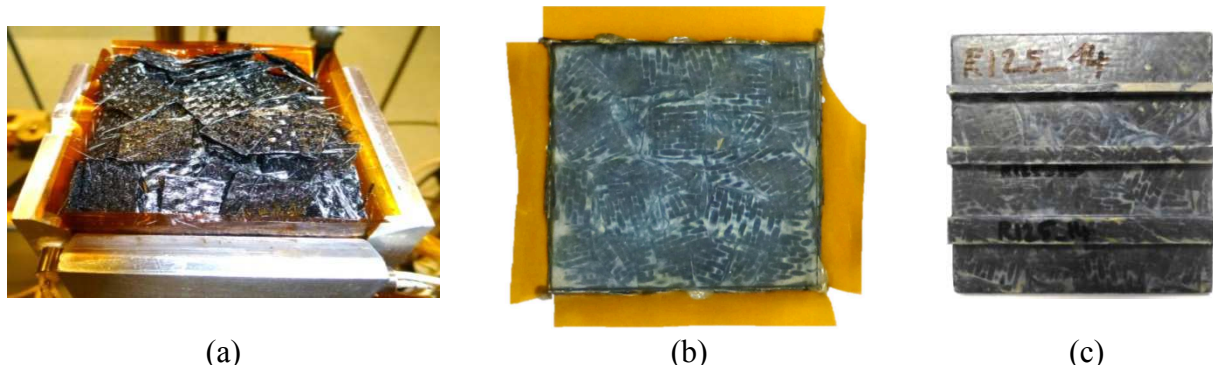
(a) Mold filled with 12.5 mm flakes, (b) front side of the molded plate after demolding (60 x 60 x 2 mm), (c) rib side of the plate after de-flashing and removal of PI foils from the sides.
